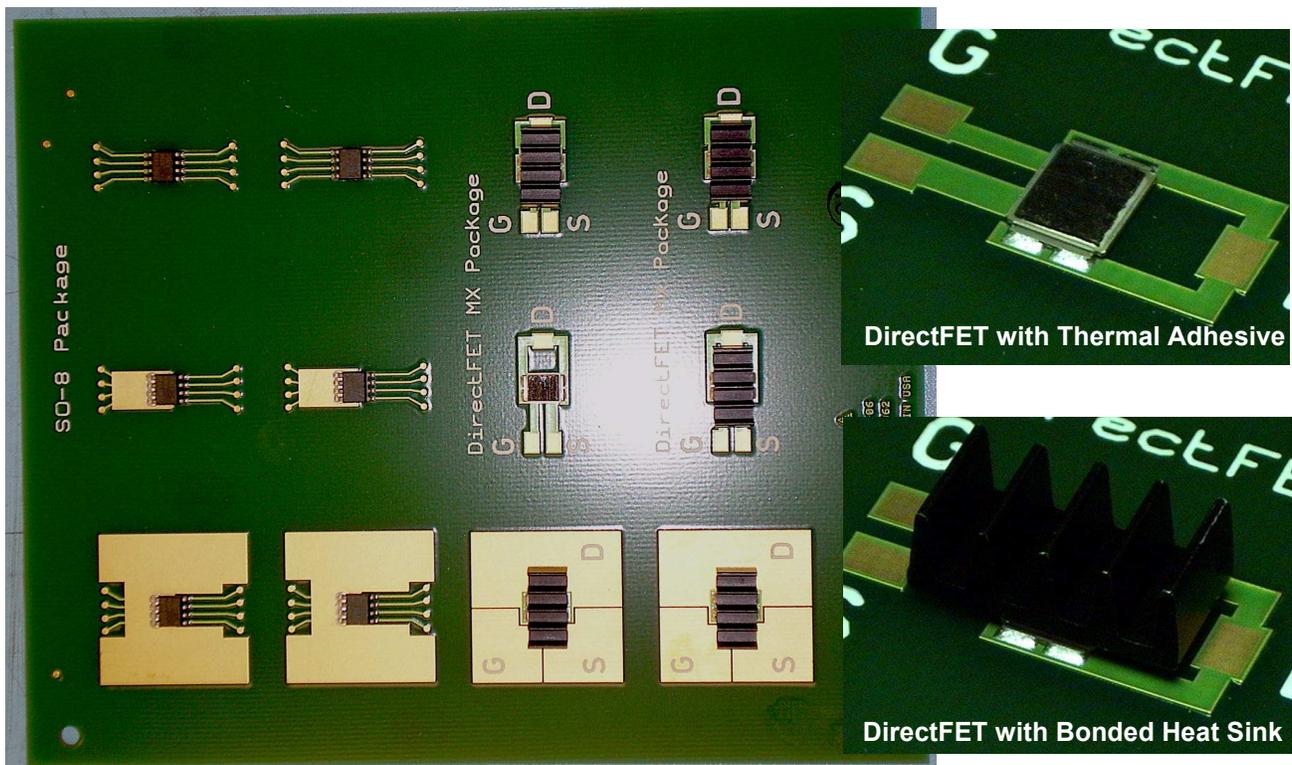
Thermal Resistance Board Assembly with Heat Sinks
